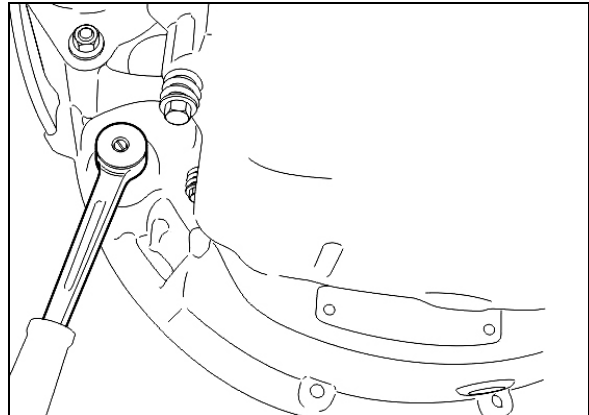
VOLVO ENGINE CRANKING POSITION
